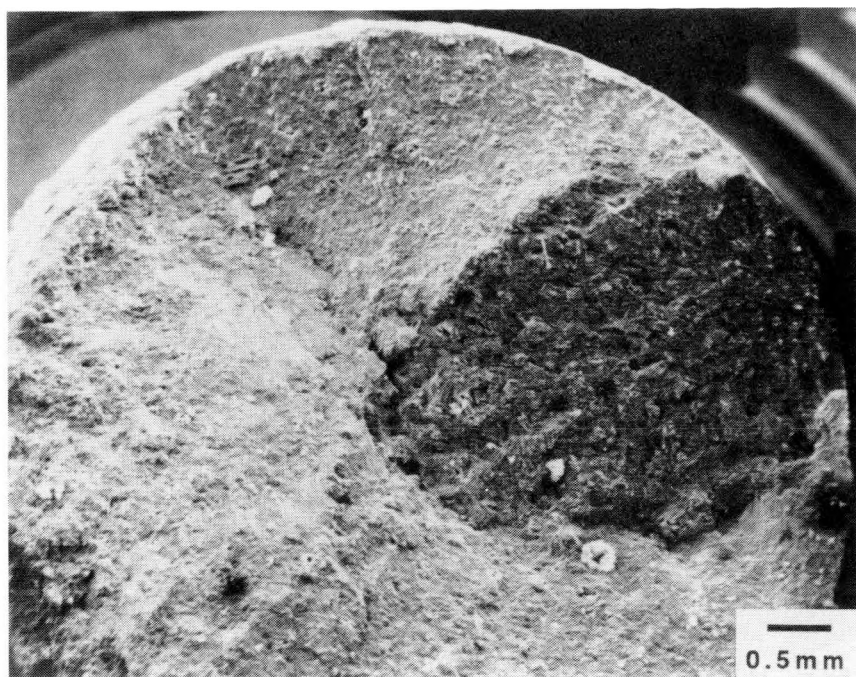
Fracture Surface of an Al06B Ferritic Steel CERT Specimen.
